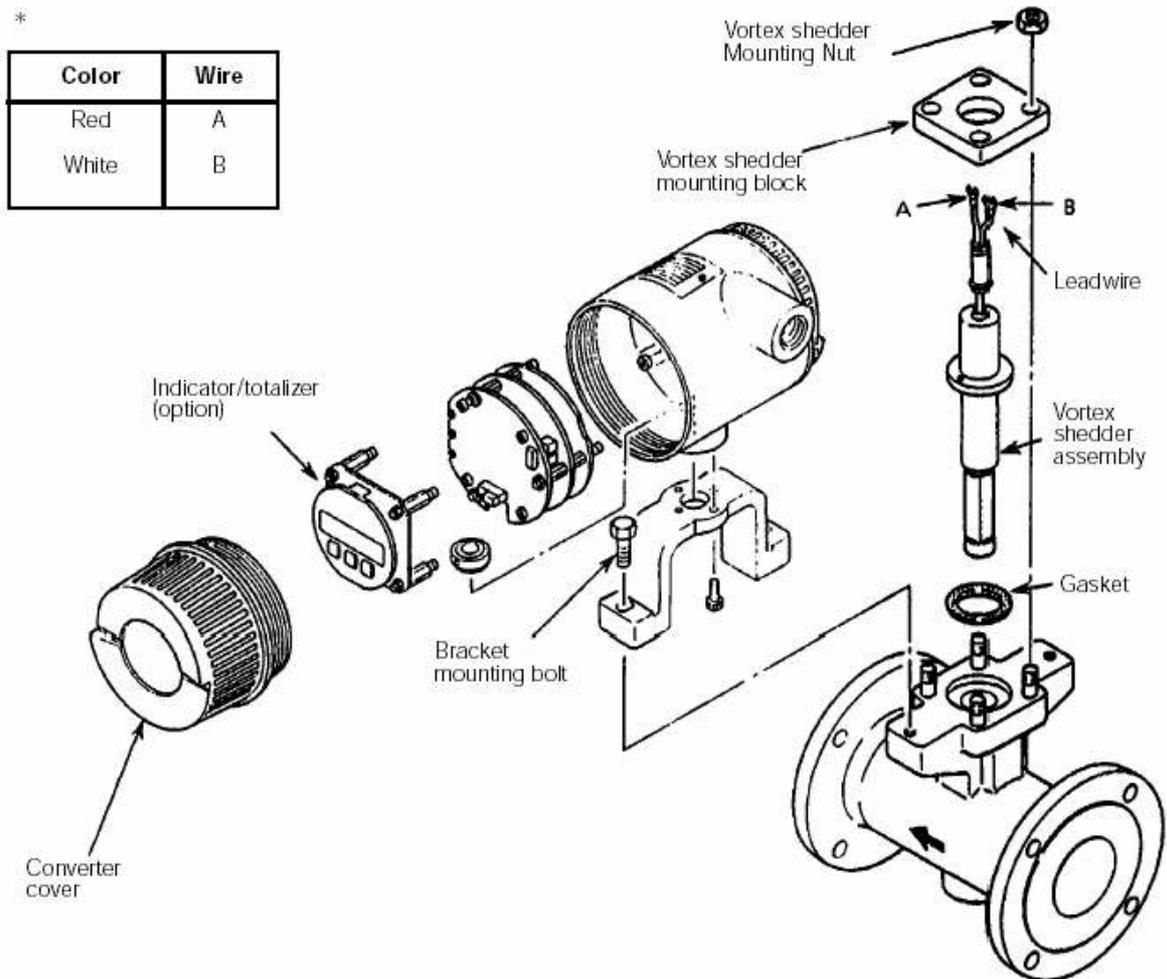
Disassembling and reassembling the Vortex shedder assembly
